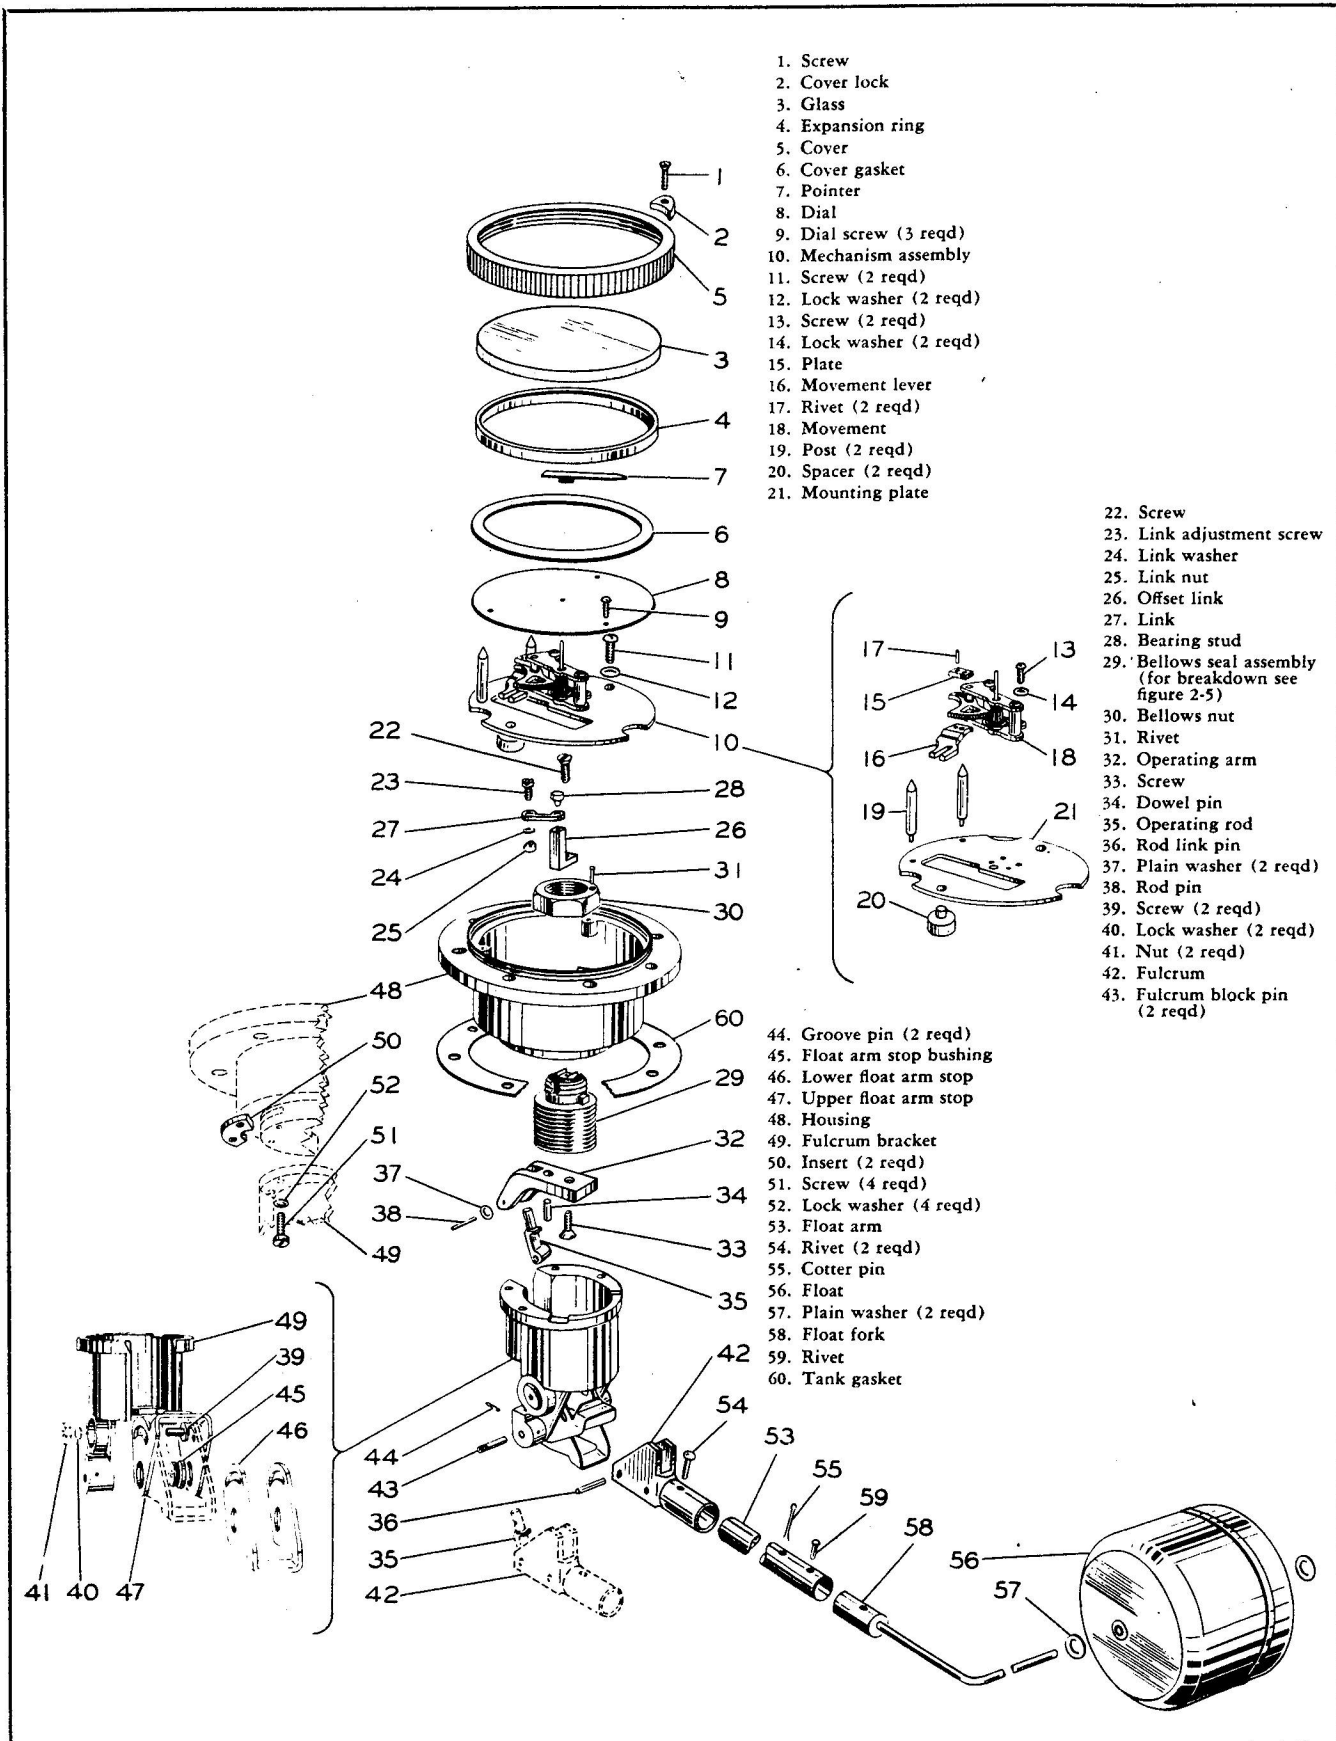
Exploded View, Tank Unit No. EA503-729
